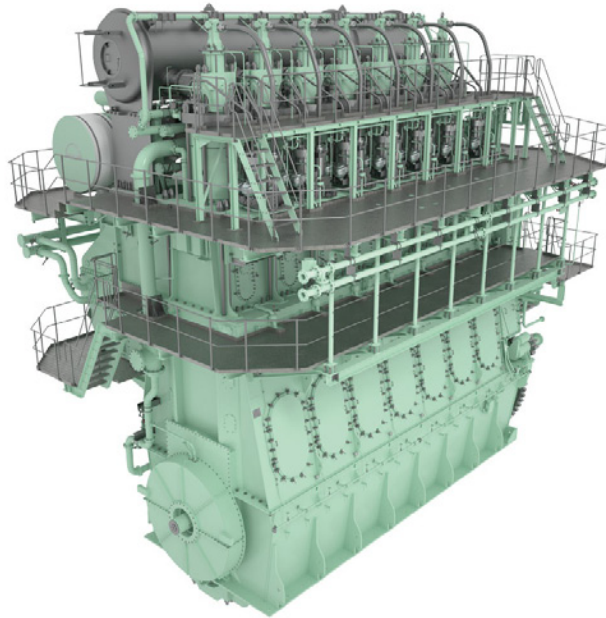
General view of the main engine MAN B&W k90ME-C6 [8]
